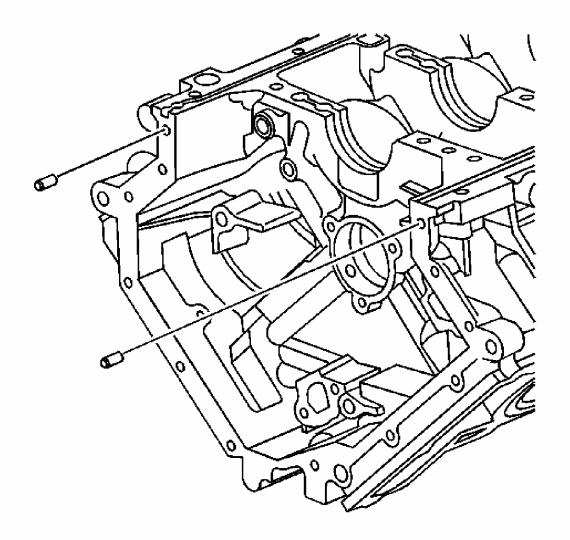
Identifying Engine Front Cover Dowel Pins Courtesy of GENERAL MOTORS CORP.
